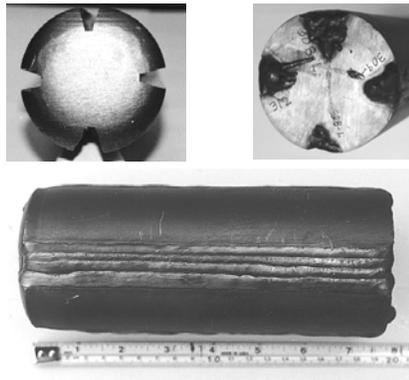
Type 304L Forging with Cut Grooves and Weldments Made Using Types 308L, 309L MOD, and 312 MOD Filler Materials.
